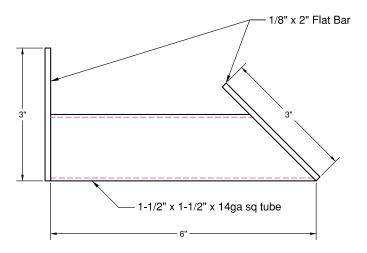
a) Plan view of jig used to attach the angled sides.
